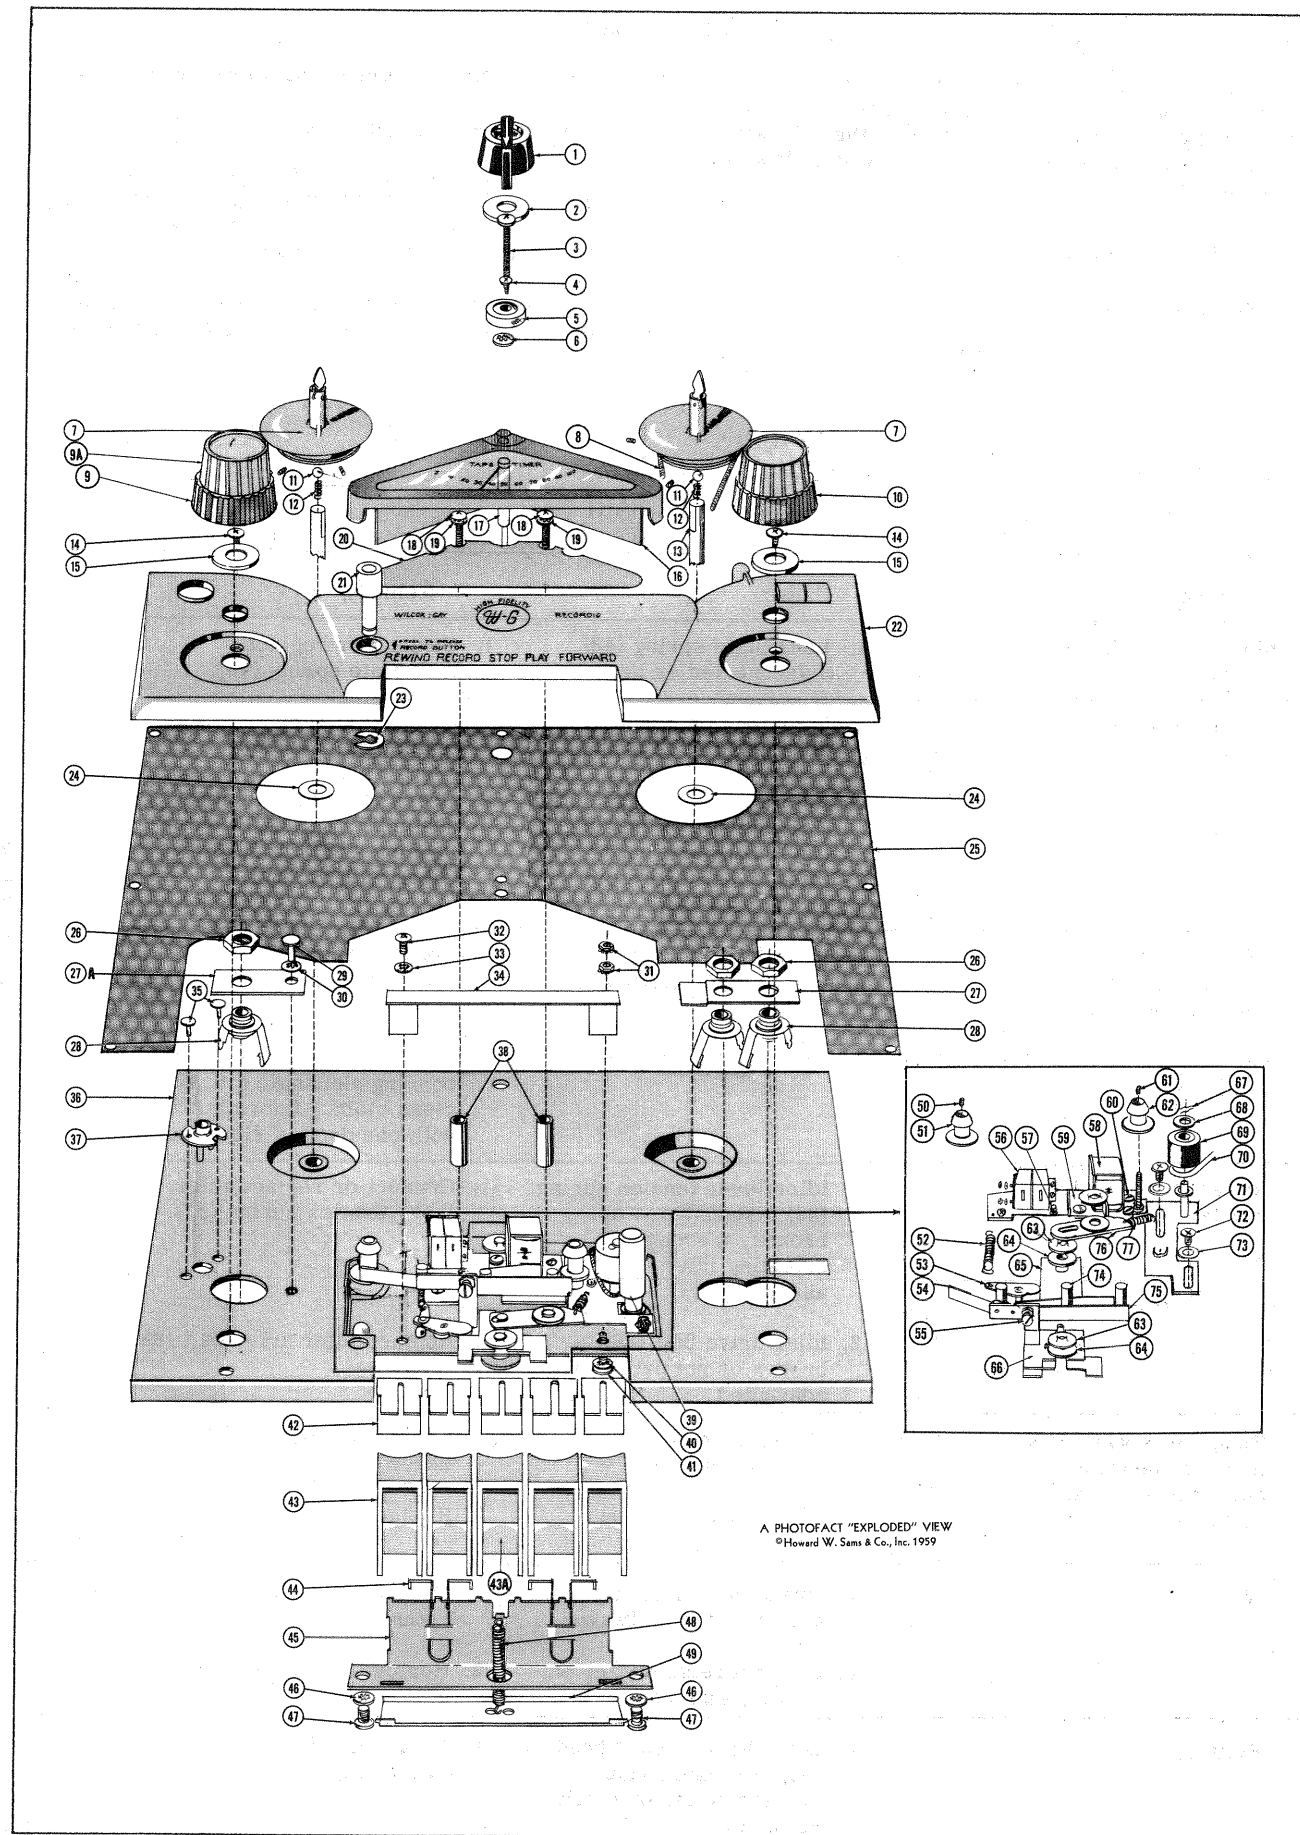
A EXPLODED VIEW OF PARTS ABOVE BASEPLATE
